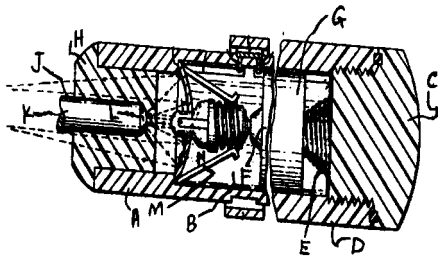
A typical example of the subject matter. A - Casing; B - Chamber; C - Removable cap; D - Handle; E - Spring in electrical engagement with "F" and "G"; F, G - Dry cell; H - Plastic plug; J - Axial bore socket; K - Screwdriver provided with convex reflective surface "L"; L - Convex reflective surface; M, N - Spring and reflector plate to hold bulb
